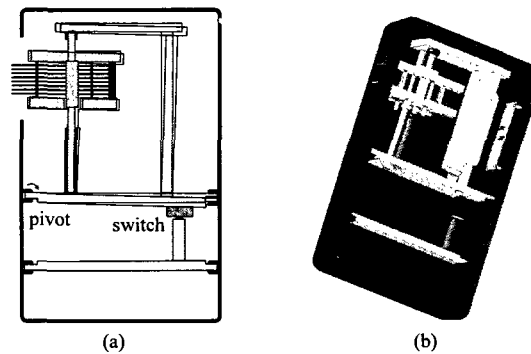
(a) Integration of the sub-assembly in prototyping box and (b) 3D view of the integrated system.
